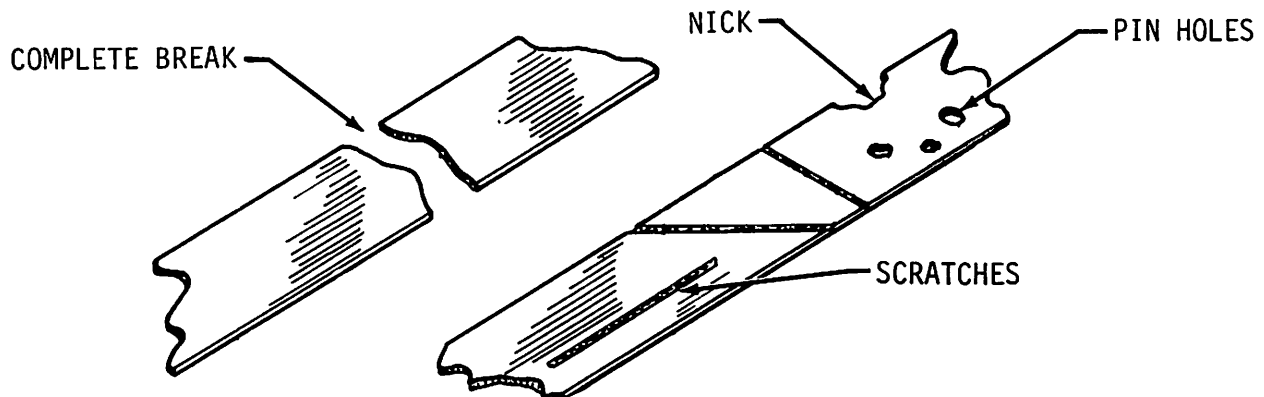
TYPICAL PRINTED WIRING DAMAGE
